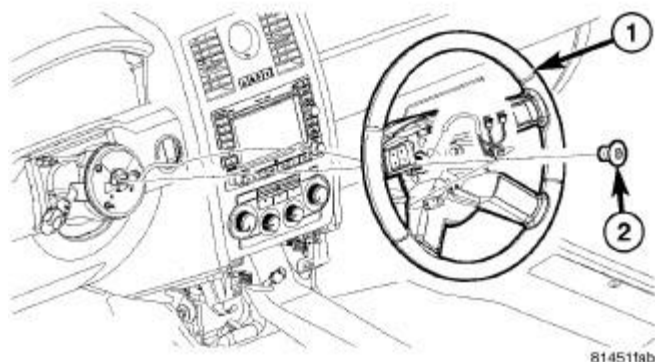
STEERING WHEEL REMOVAL & INSTALLATION
